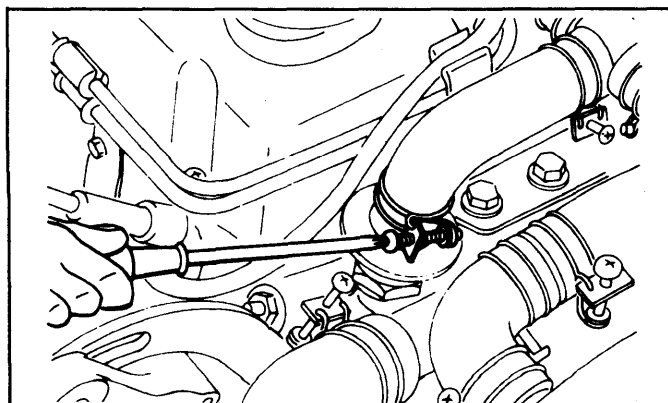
B210 & F10 Air Hose/Check Valve Location
